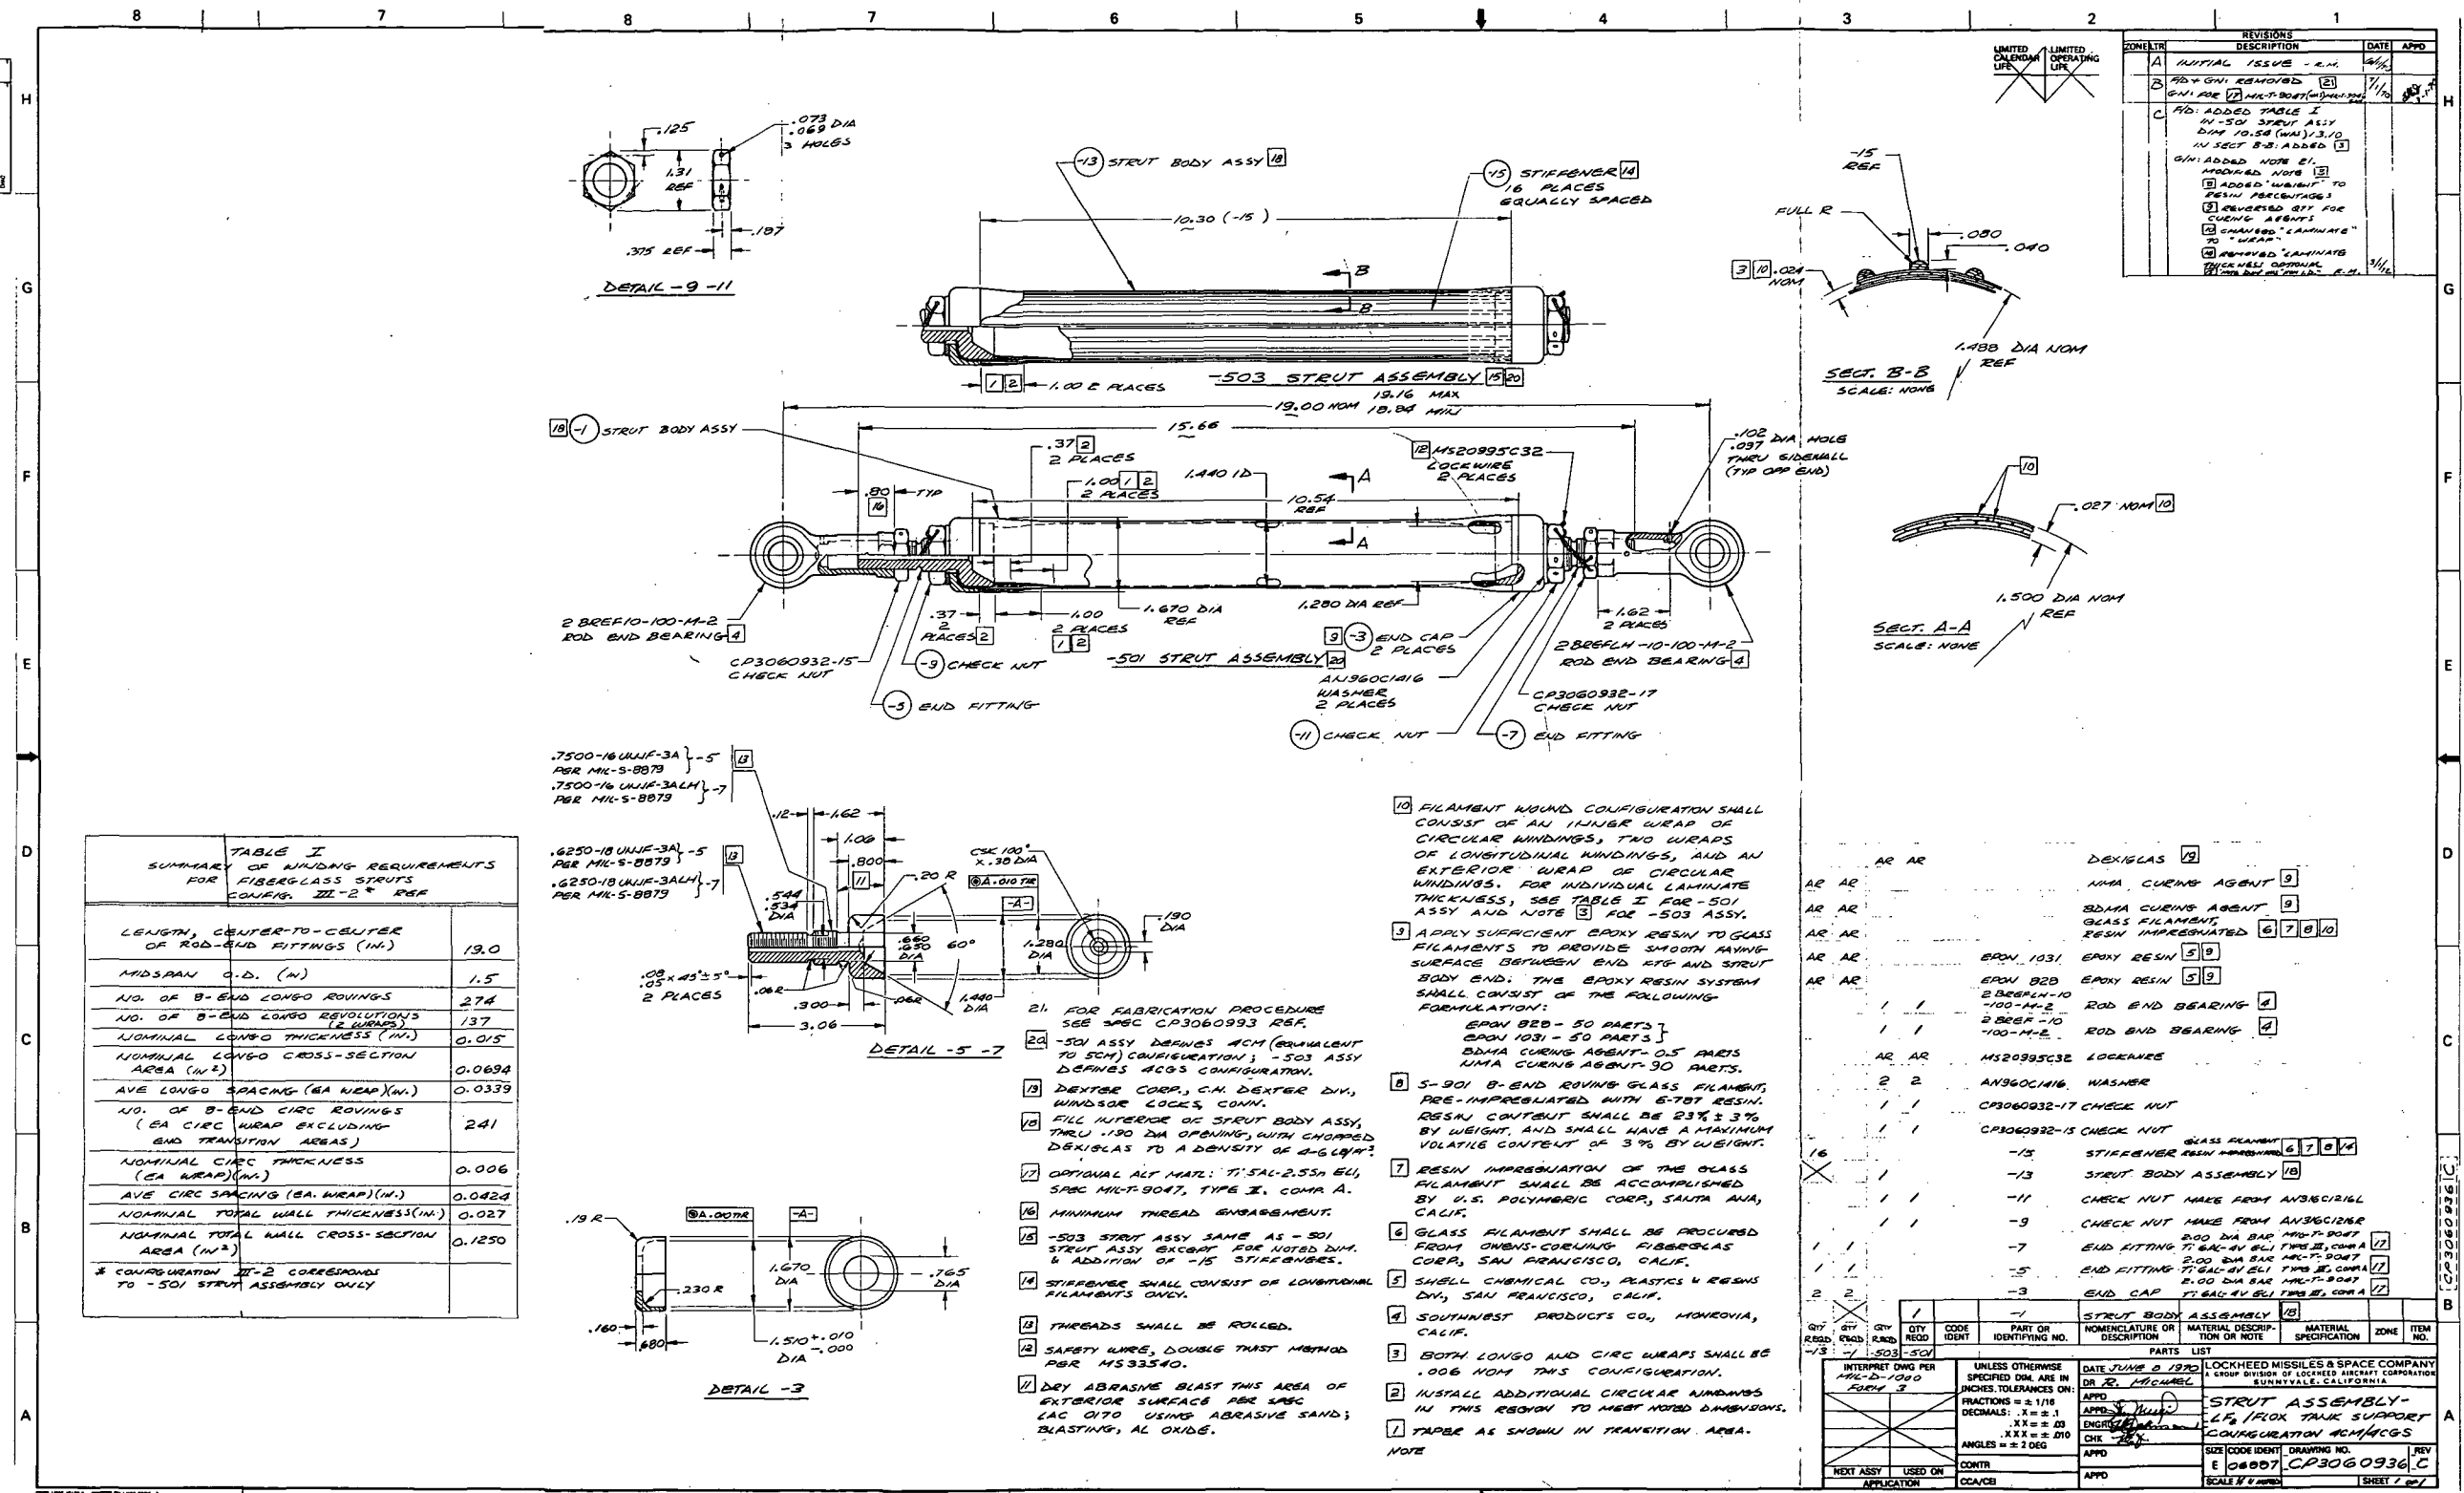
Design Assembly Drawing for Strut Configurations II-2, II-3, and III-2
